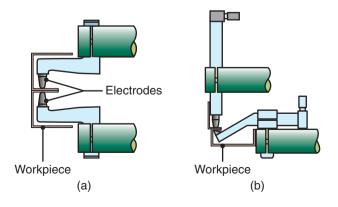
Two electrode designs for easy access to the components to be welded.
